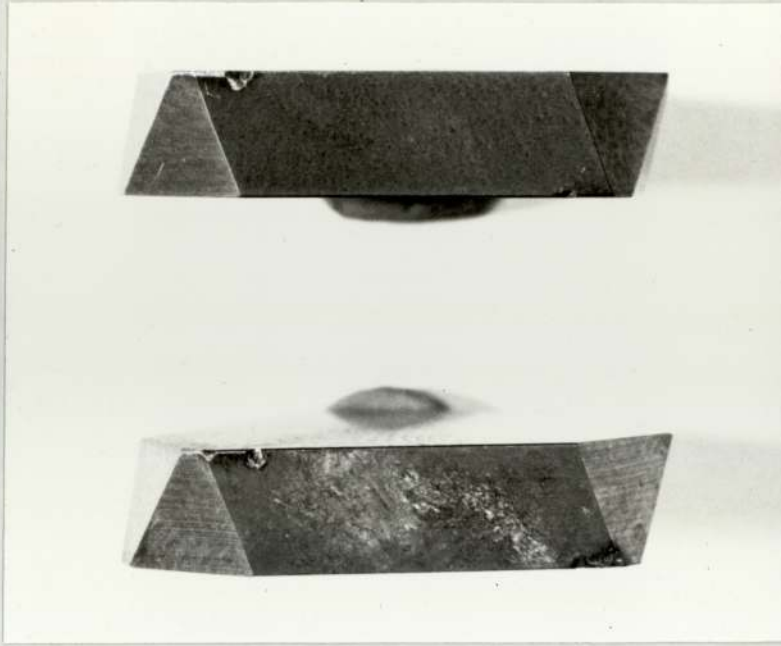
Chipping of Cutting Edges in Up-Cut Milling
